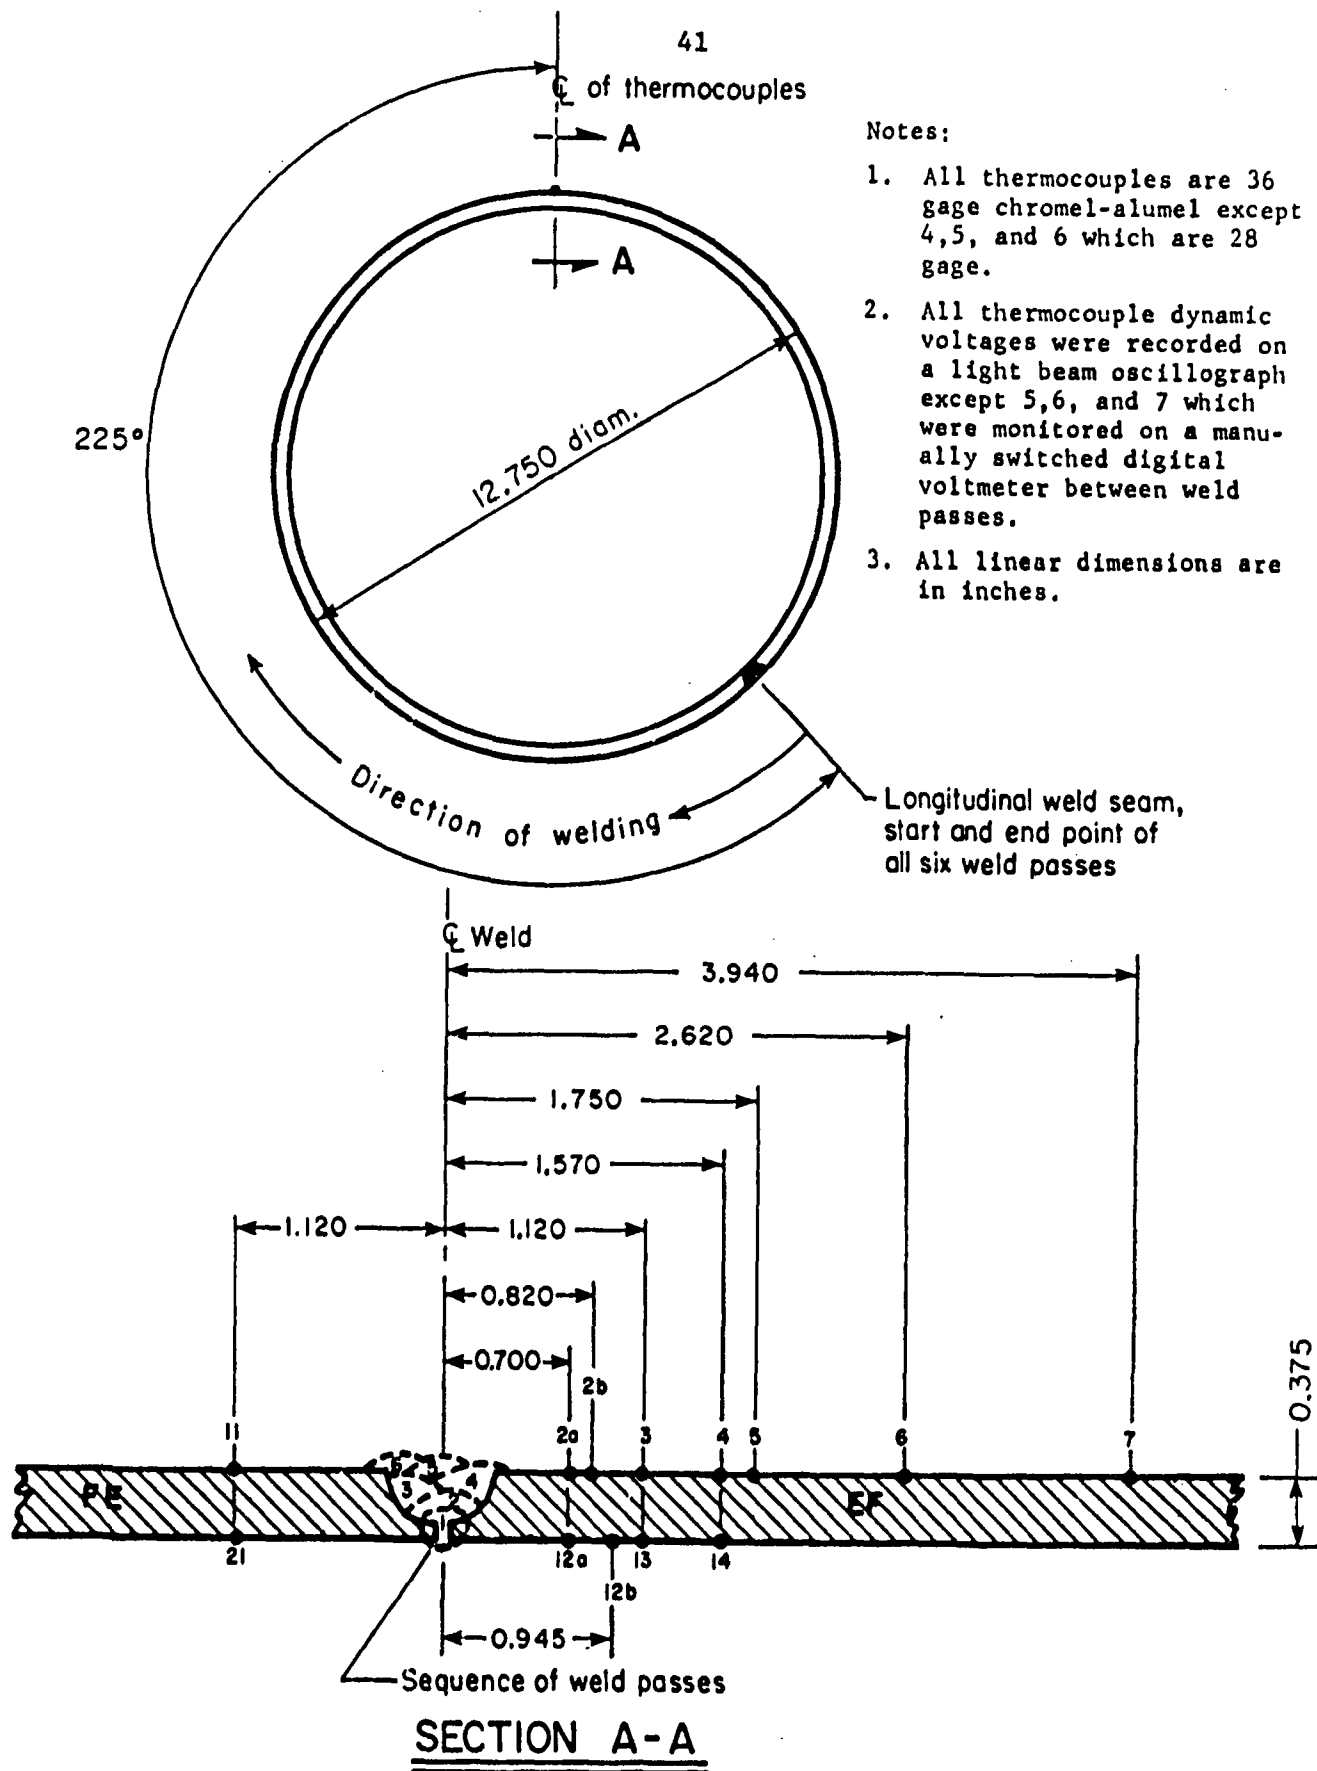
THERMOCOUPLE ARRAY FOR SIX-PASS WELD
